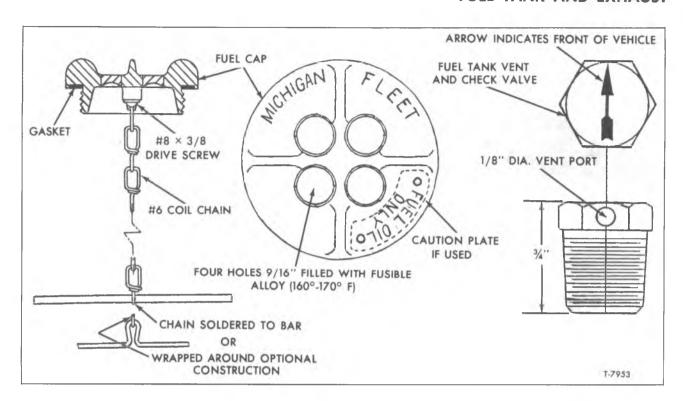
Safety Cap and Vent Check Valve Plug (Typical)
